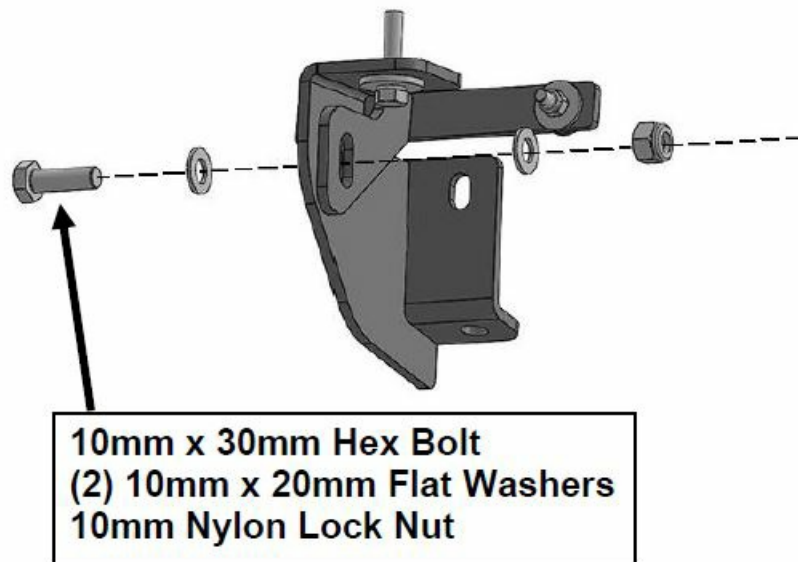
Attach the Passenger/Right Front Mounting Bracket to the Threaded Hole
